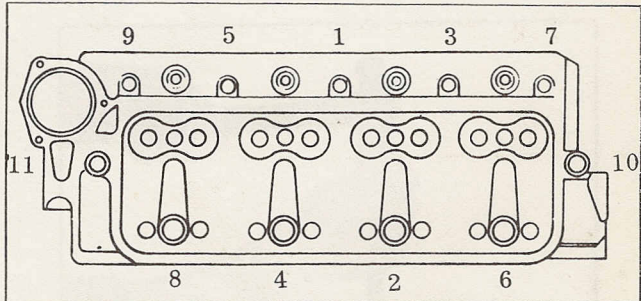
The Order of Tightening the Cylinder Head Nuts
